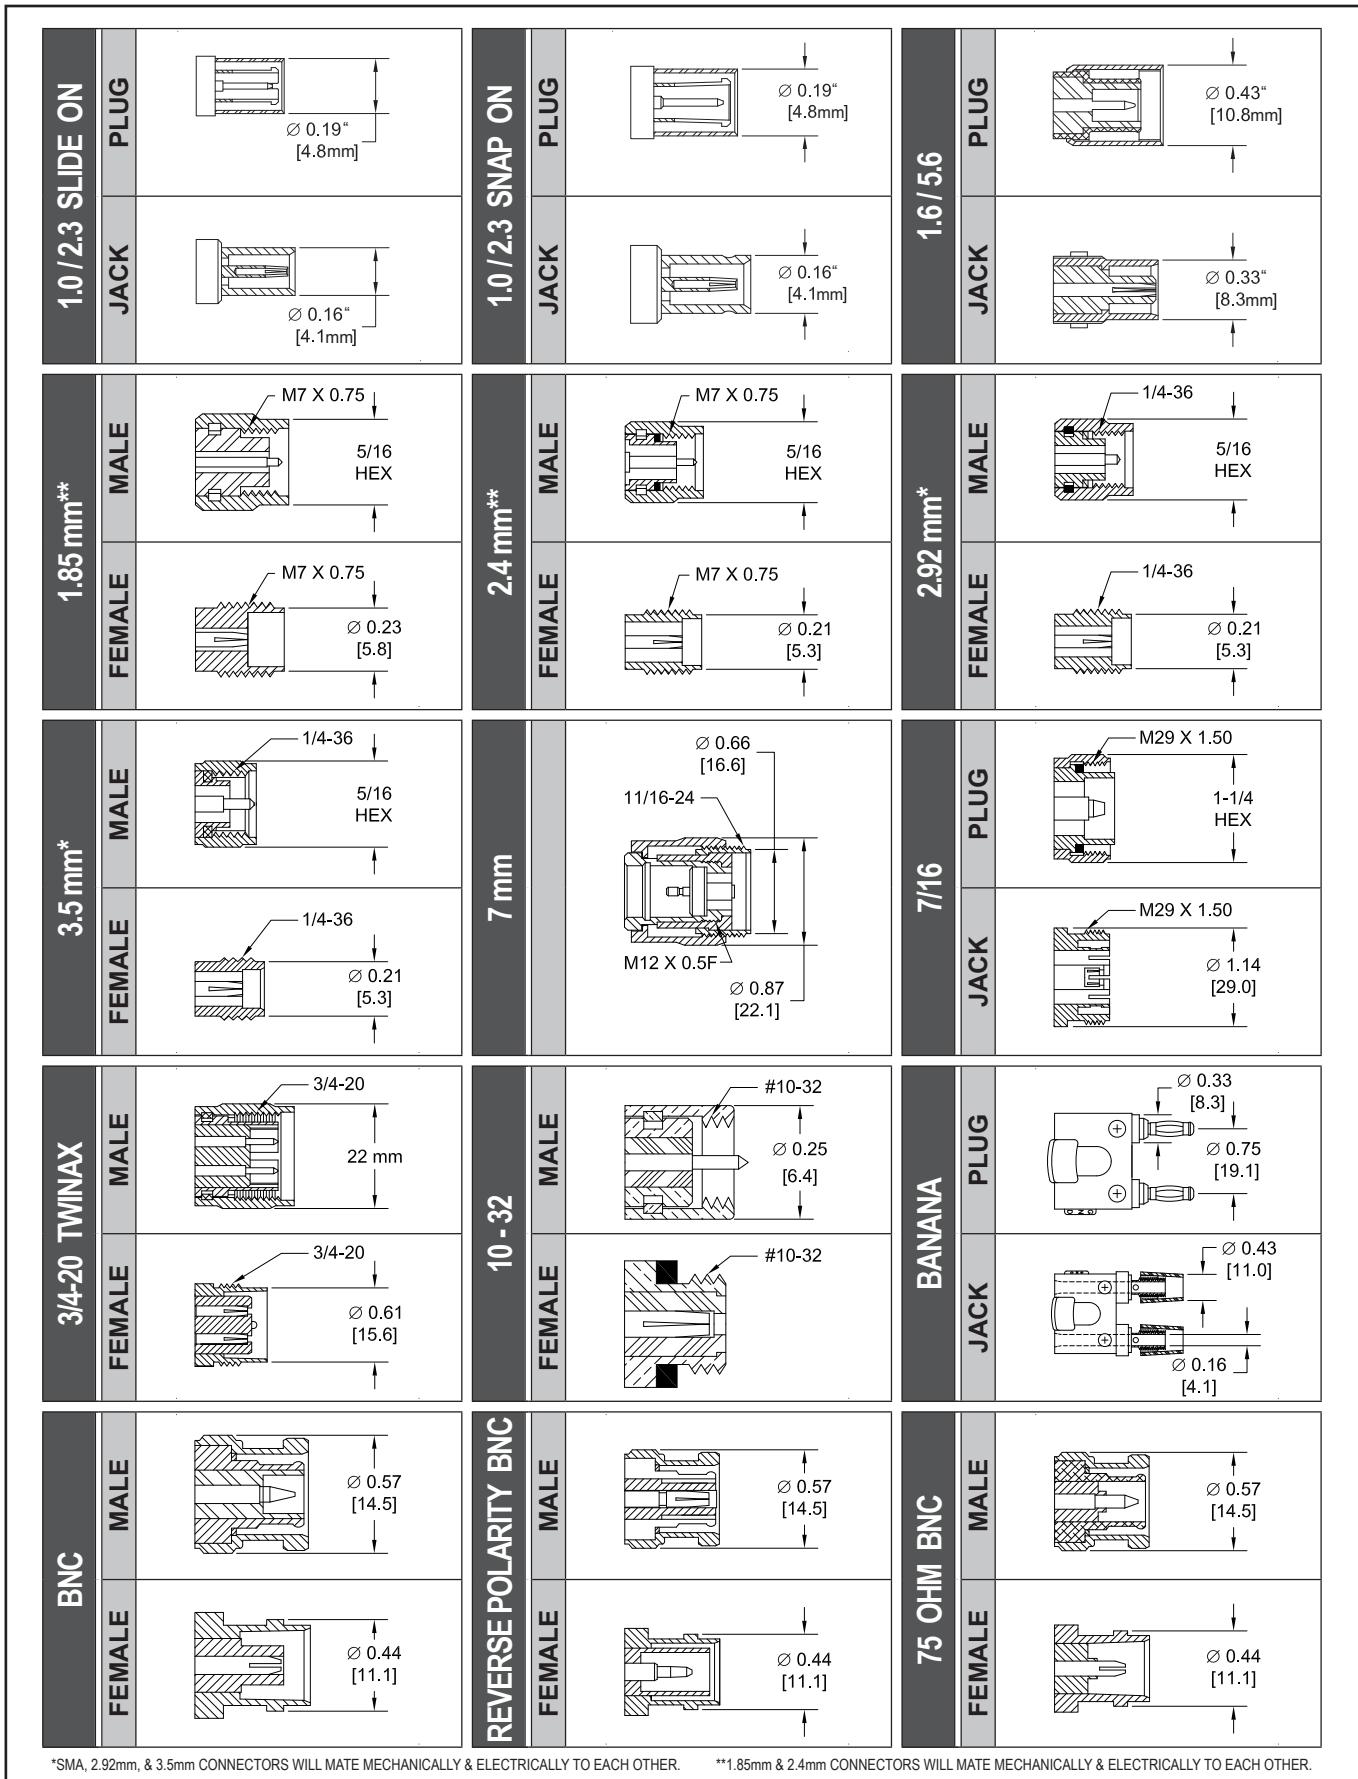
A — Connector side views, set 1 of 4. [Courtesy of Pasternak]
